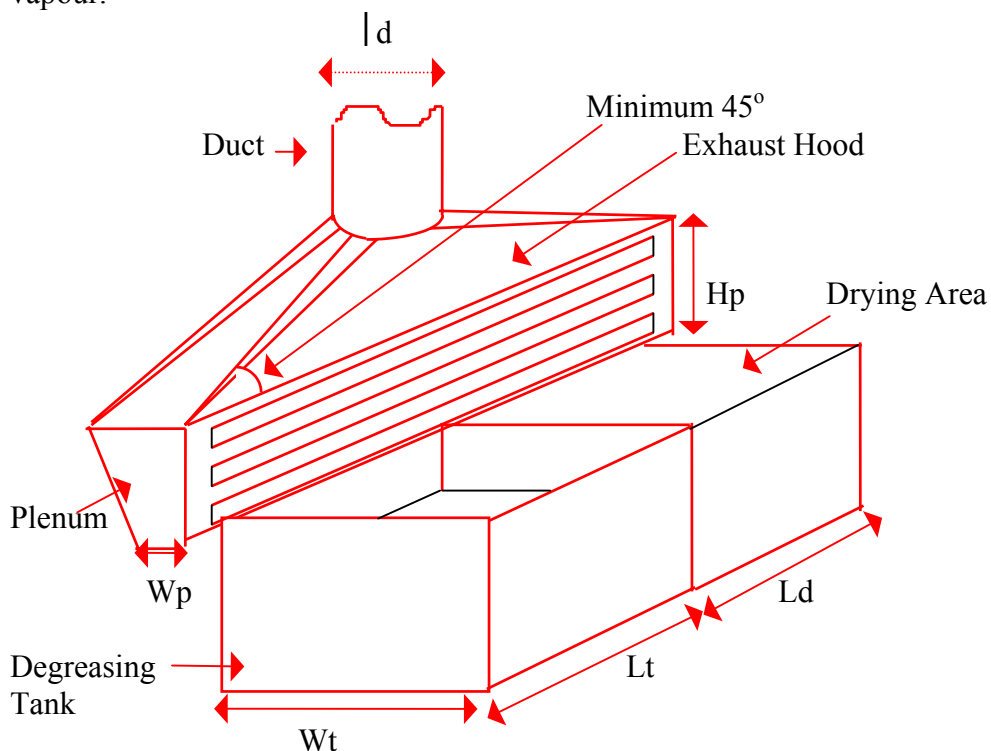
Lateral Exhaust Hood for Large Degreasing Tank
